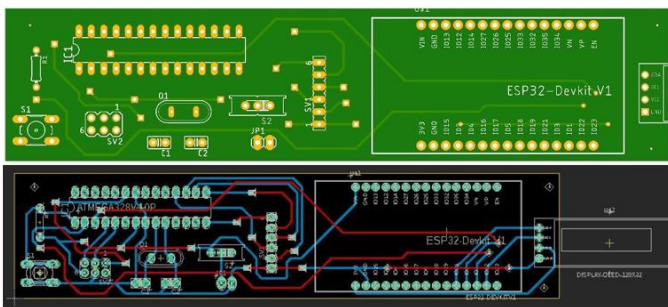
Eagle CAD schematic of External Printed Circuit Board
